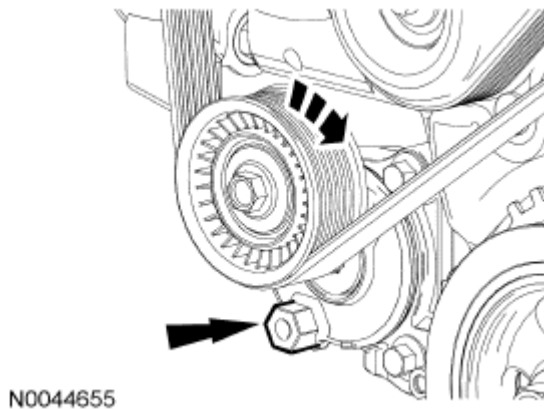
Rotating Accessory Drive Belt Tensioner Clockwise
